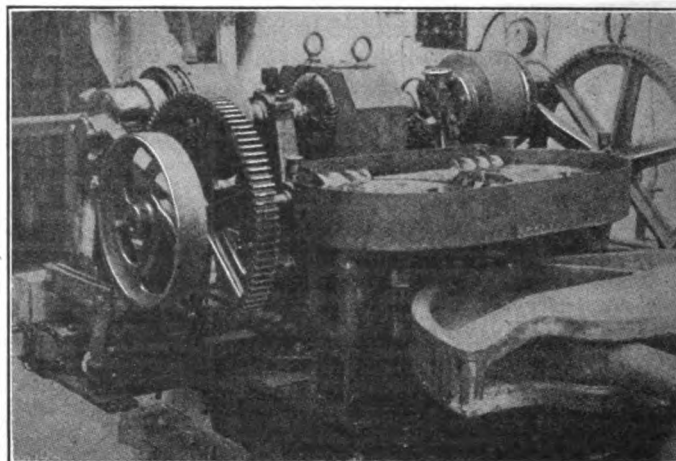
ELECTRICAL STEERING GEAR, SHOWING DOUBLE-WORM GEAR AND CROSS-HEAD SECTOR
